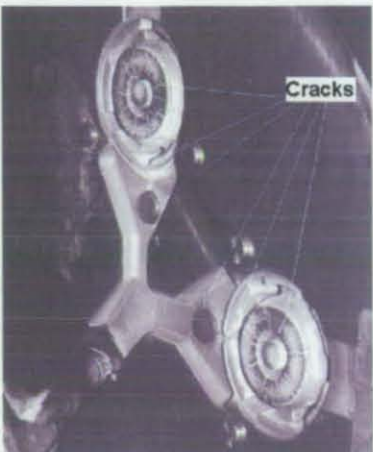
Damage inflicted on MetalCopy insert after die casting 500 parts
